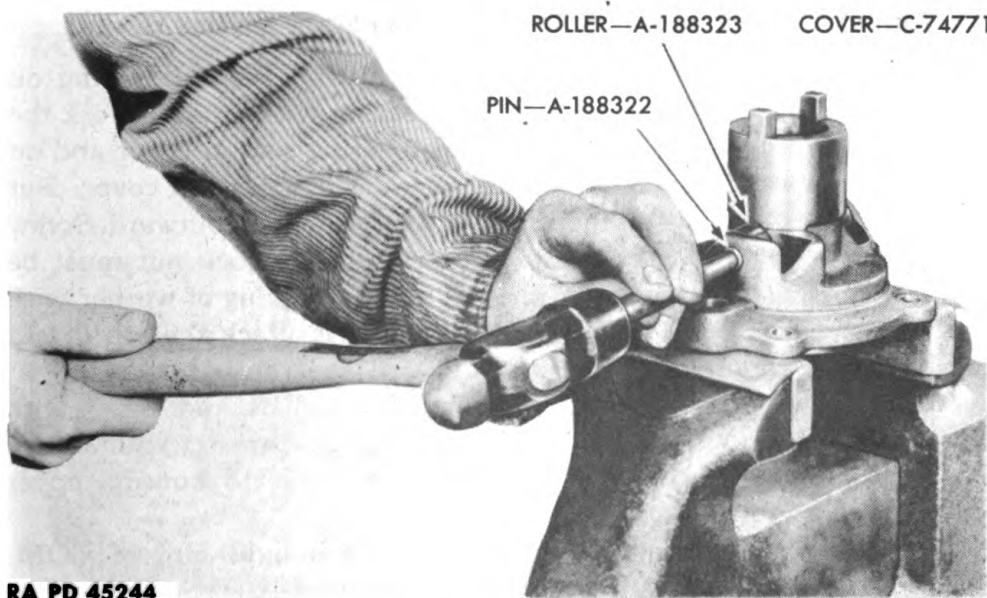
Removing Pin and Roller from Elevating Brake Drum Shaft End Cover
